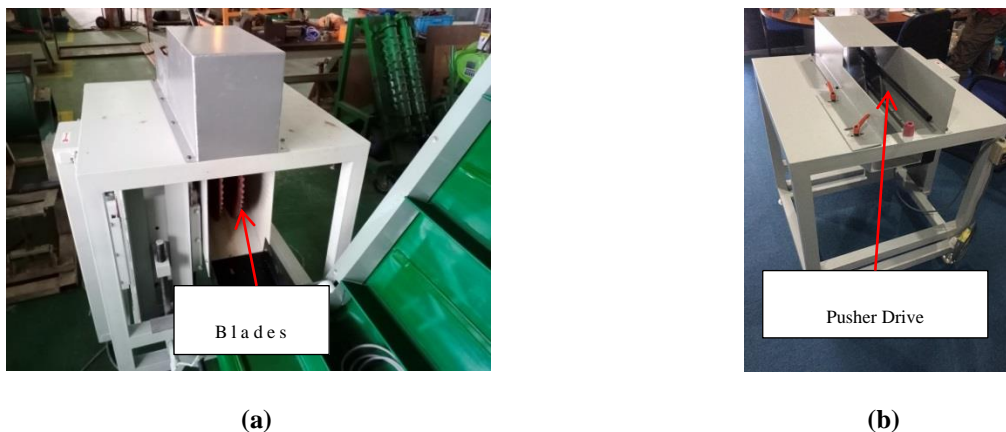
Chopping machine consist of: (a) Two blades; (b) Pusher drive.
